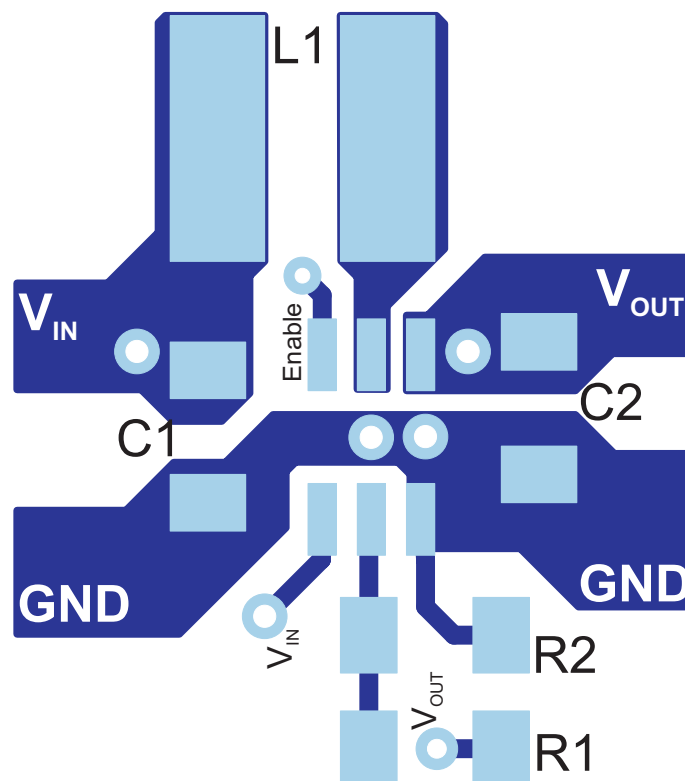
PCB Layout Suggestion For Adjustable Output Voltage Options
